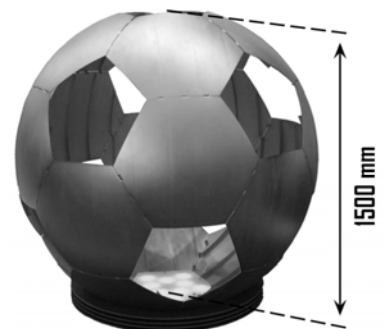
Demonstrator sheet structure made of hydroformed stringer sheets
